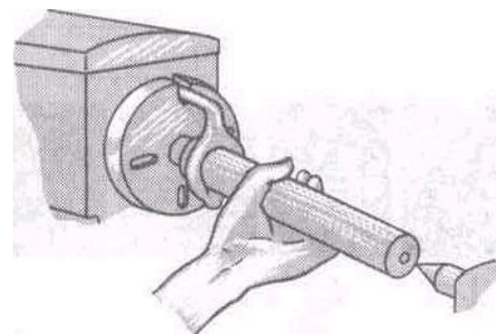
Engaging the live center. The lathe dog is mounted on the workpieces.
